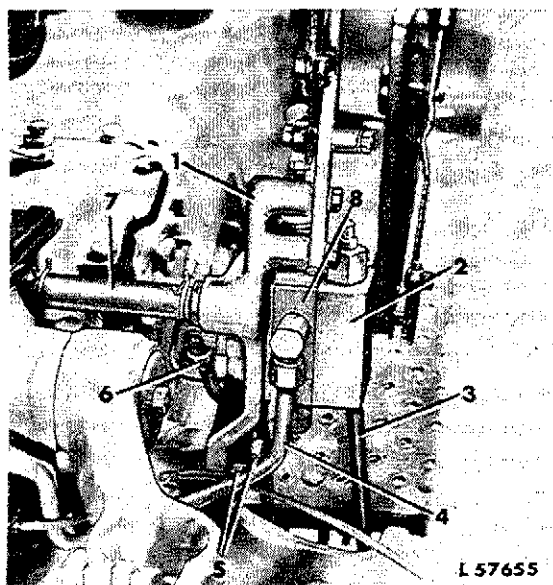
Oil Manifold and System Pressure Relief Valve Installed
